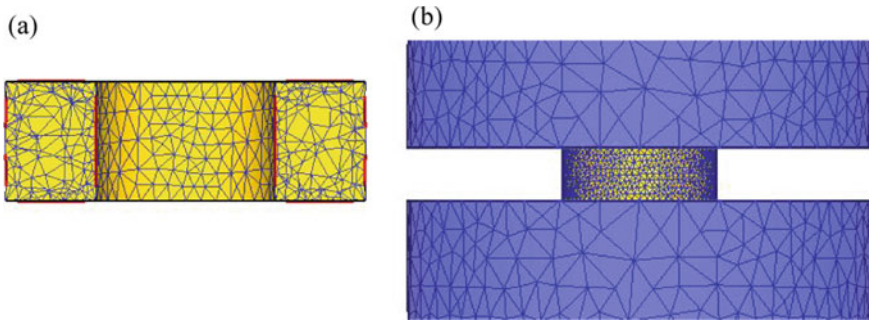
a Cross-sectional view of ring specimen, b die set assembly
